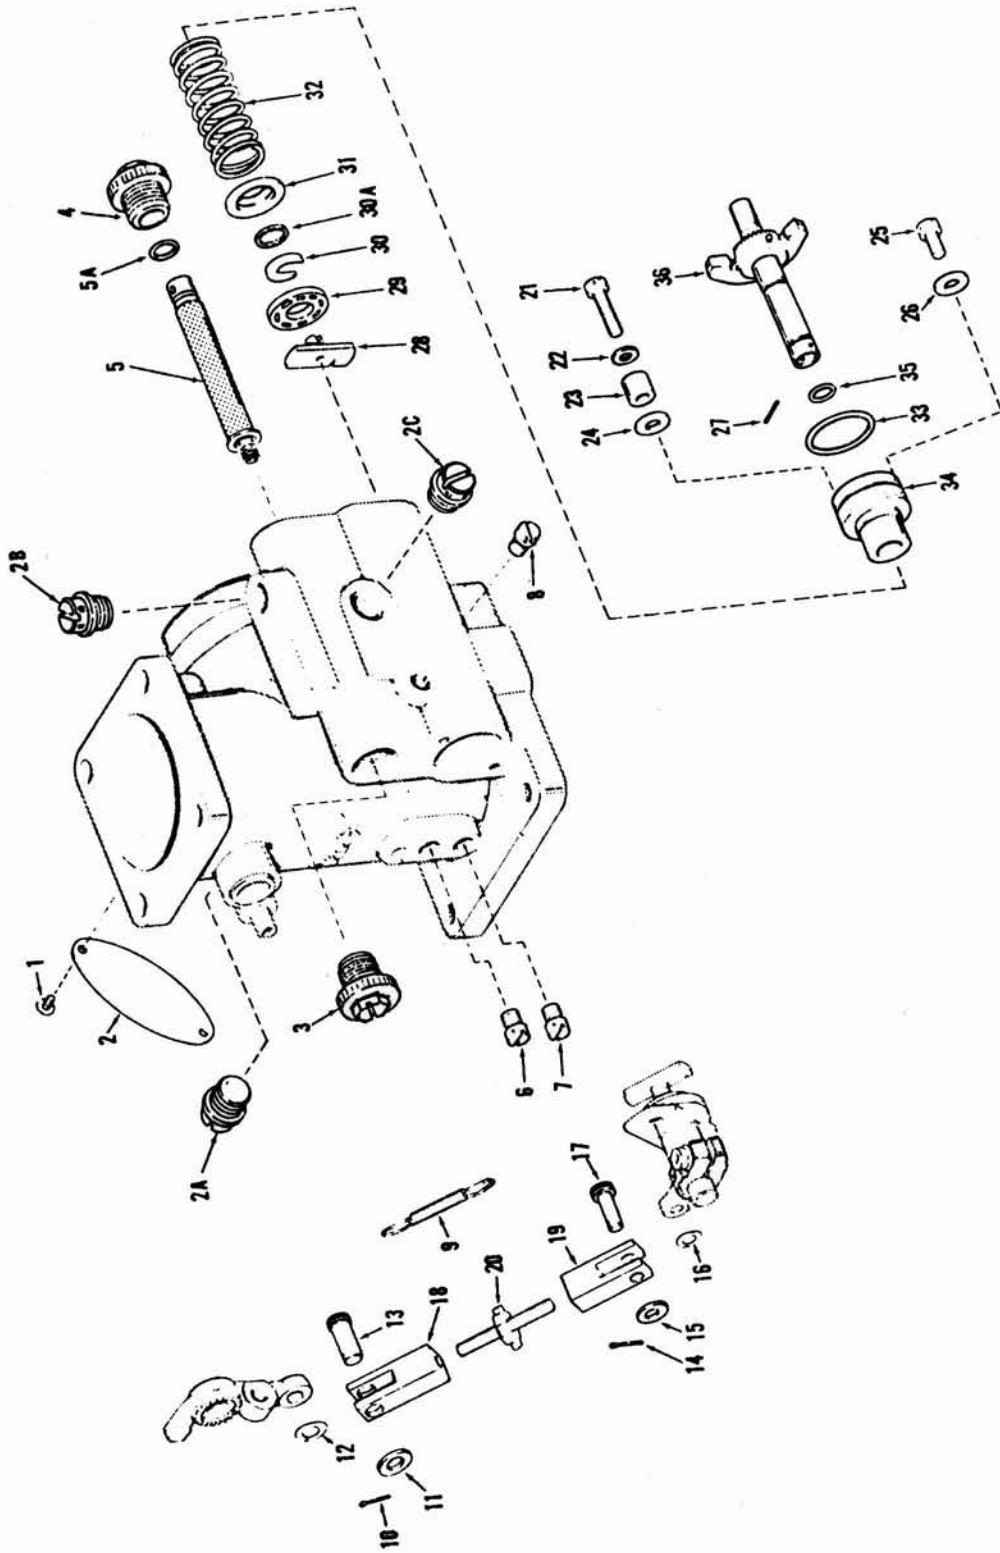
Model RSA-5AD1 Injector (Basic) (Sheet 1 of 2)
